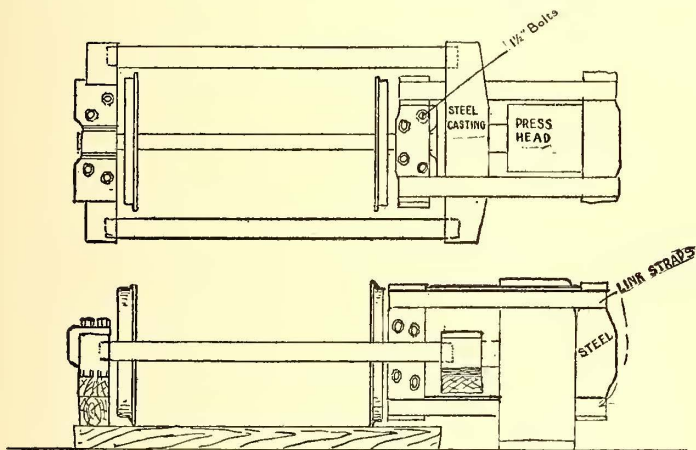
ARRANGEMENT OF WHEEL COMPRESSOR FOR TESTING AXLES
